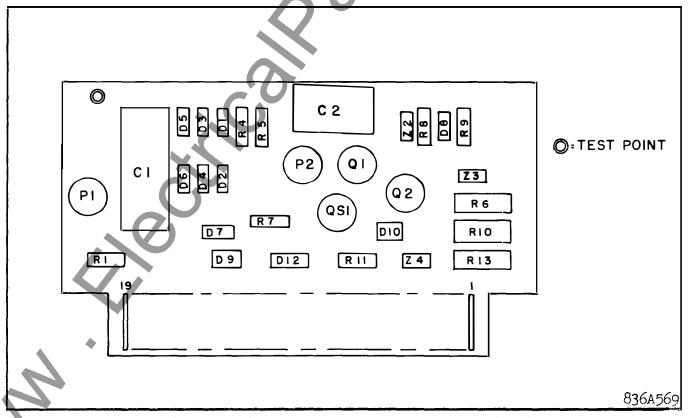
Component location on printed circuit board for the type SI-1 Relay.
